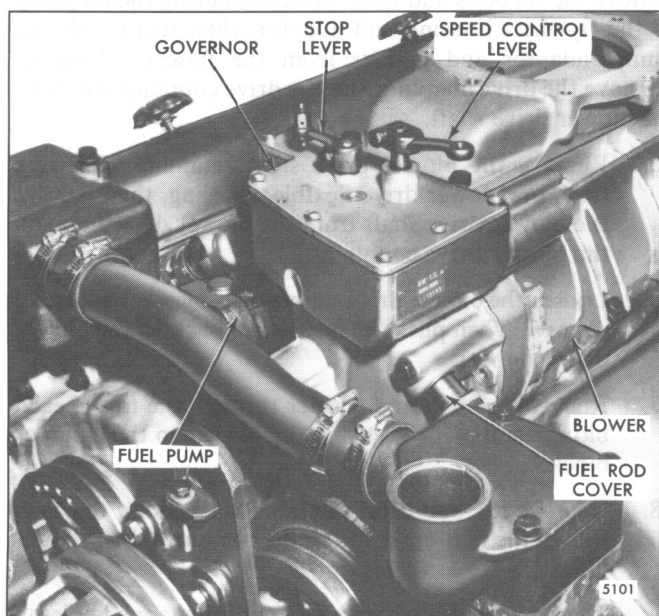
Limiting Speed Mechanical Governor Mounting
